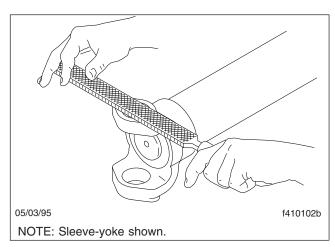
, Removing Burrs From the Machined Surface of a Full-Round Yoke Lug
